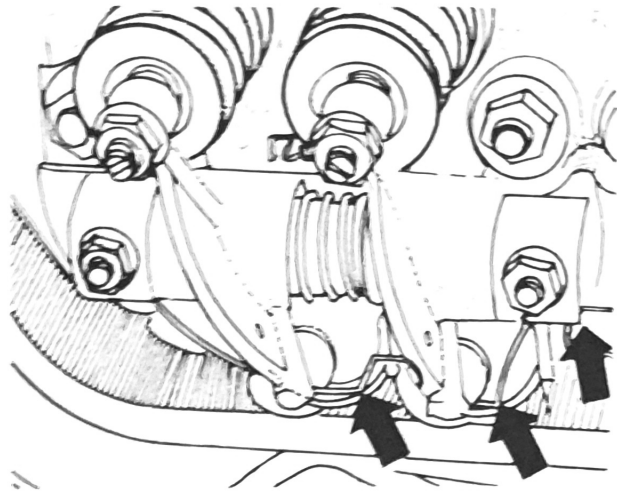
14 The wire clip for the pushrod tubes correctly engaged
